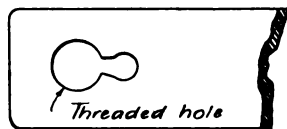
SPECIAL DIE FOR FINE THREADS.
